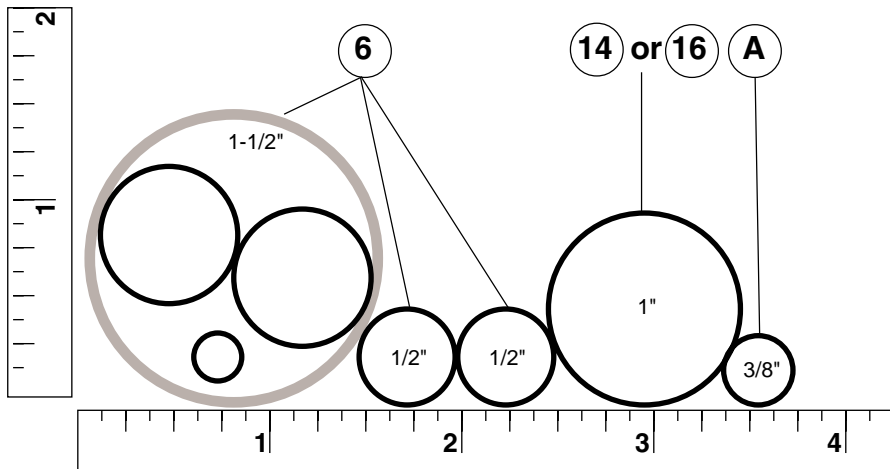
Cables / Hoses in Machine Cable/Hose Carrier - THC-2 w/Options
